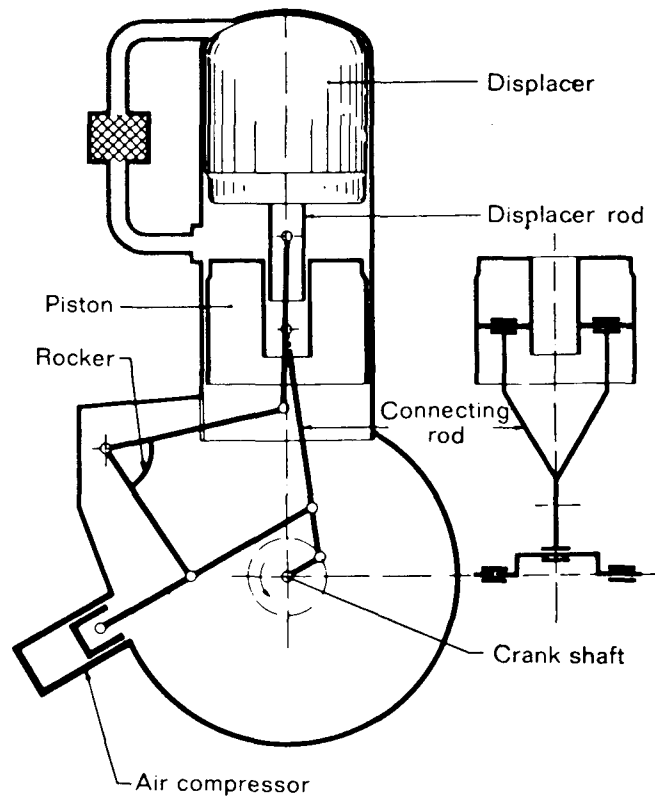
Schematic of a Crank Drive of an Early Philips Engine
